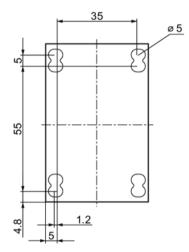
Drilling plan for contactors and contactor relays with spring-loaded connections (size S00)
